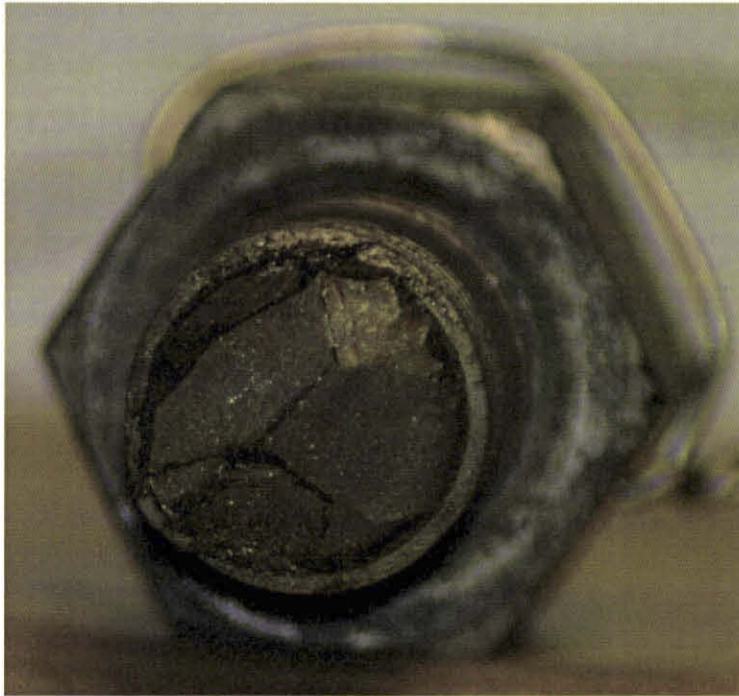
Representative pictures from fracture surface Bolt 1.
